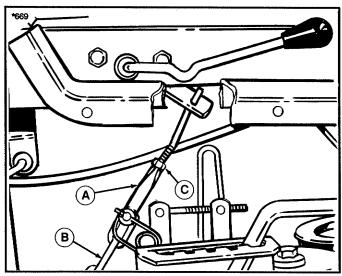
Lift Assembly Adjustment A. Clevis C. Nut
